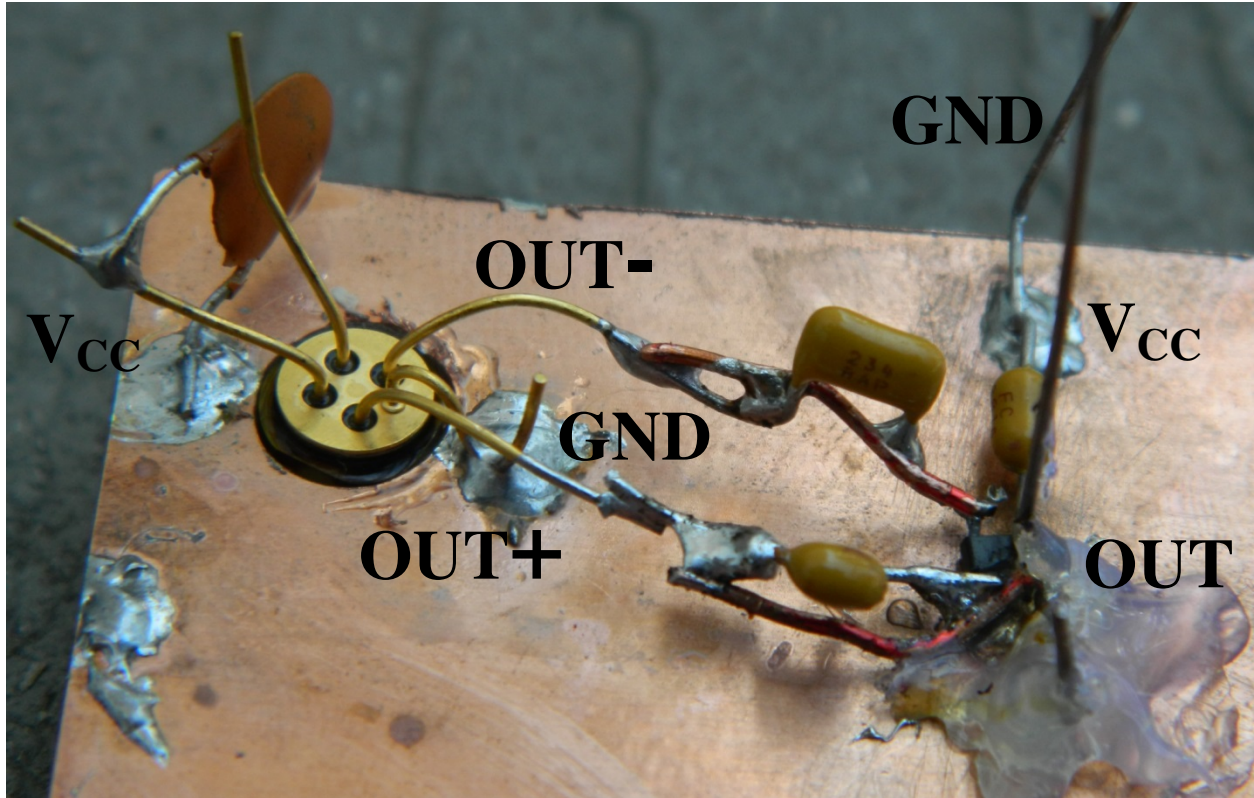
Picture of ROSA and Comparator mounted on a Printed Circuit Board
